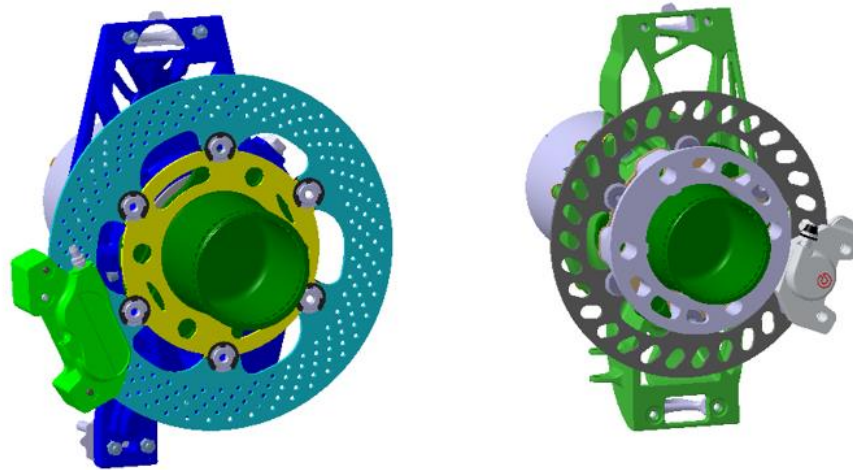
Brake callipers for the front (4 pistons)-left and rear (2 pistons)-right
